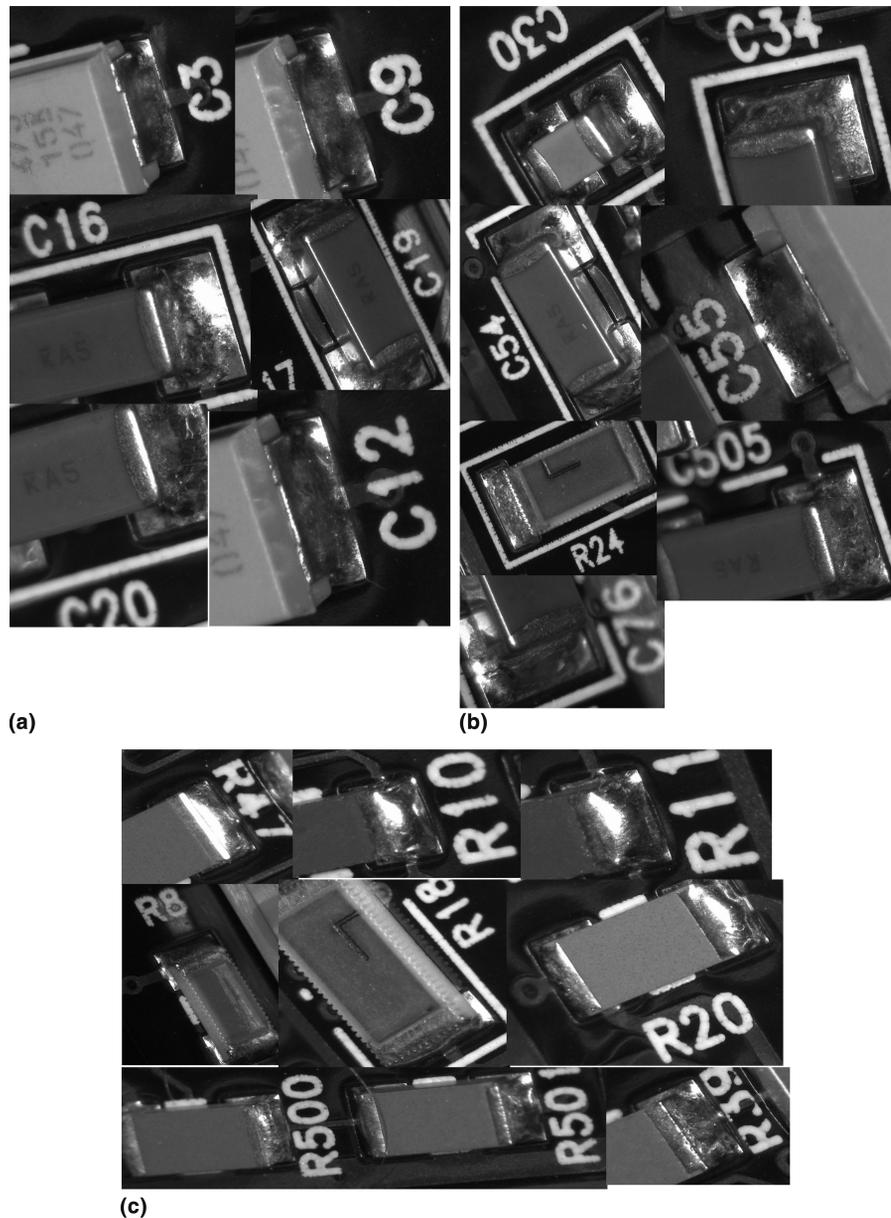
Photographs of the capacitor solder joints and resistor solder joints taken after 2010 thermal cycles.
